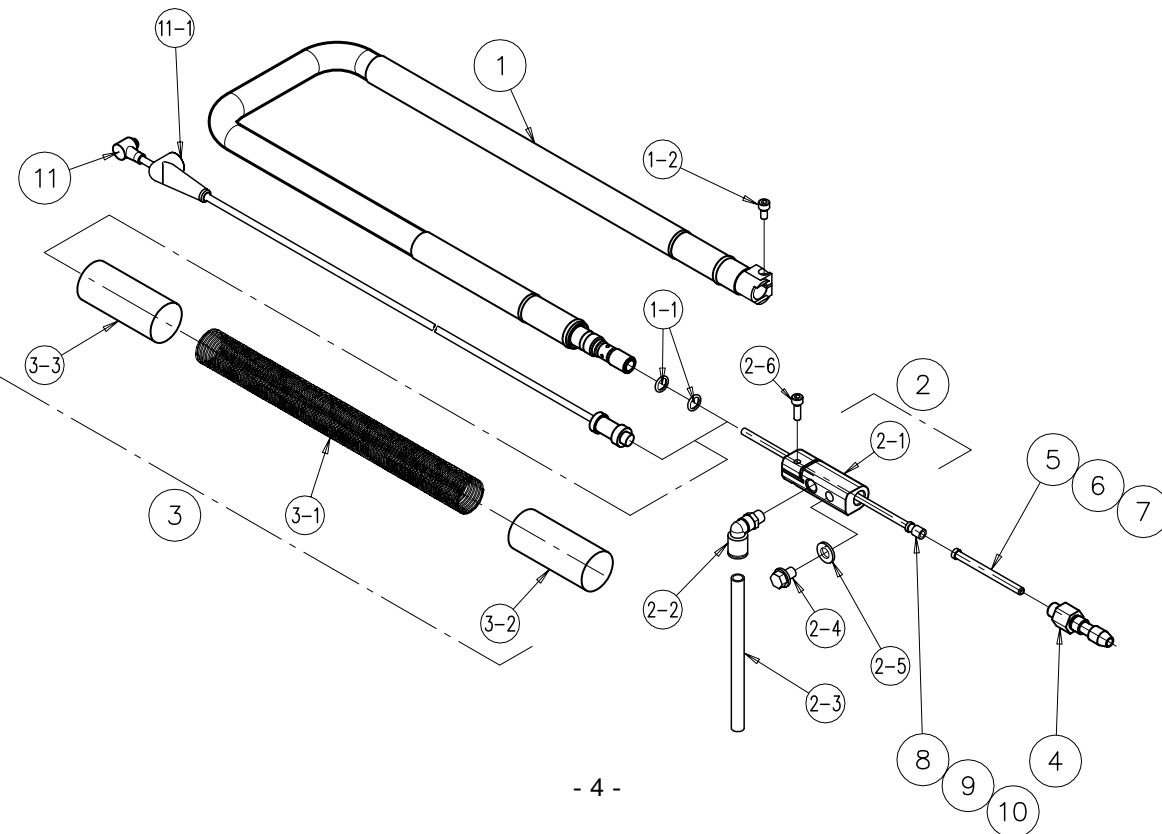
Exploded diagram for the coaxial power cable (For AX-V4AP exclusive)
